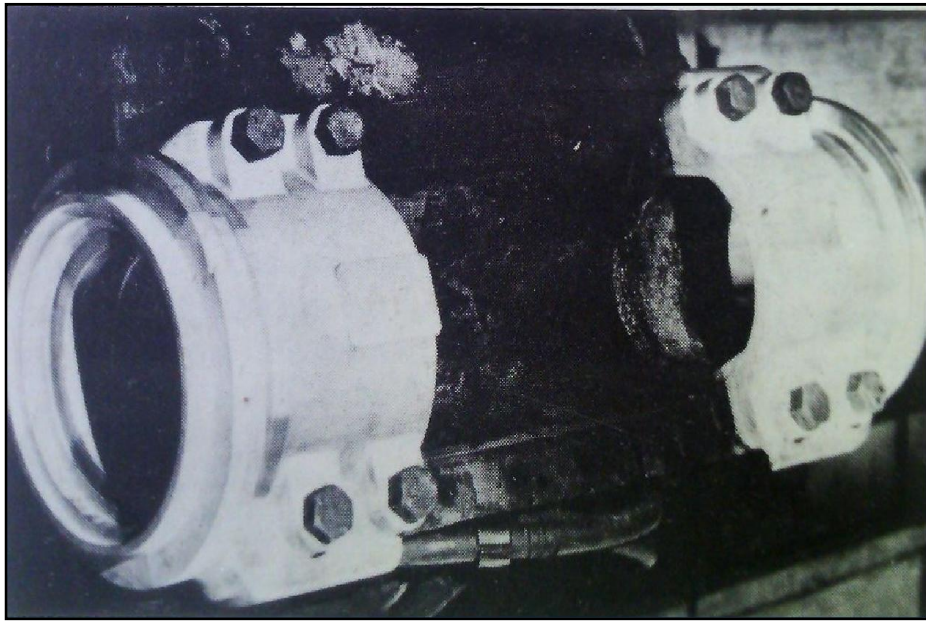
Suspension unit with independent housing clamped onto the motor frame.
